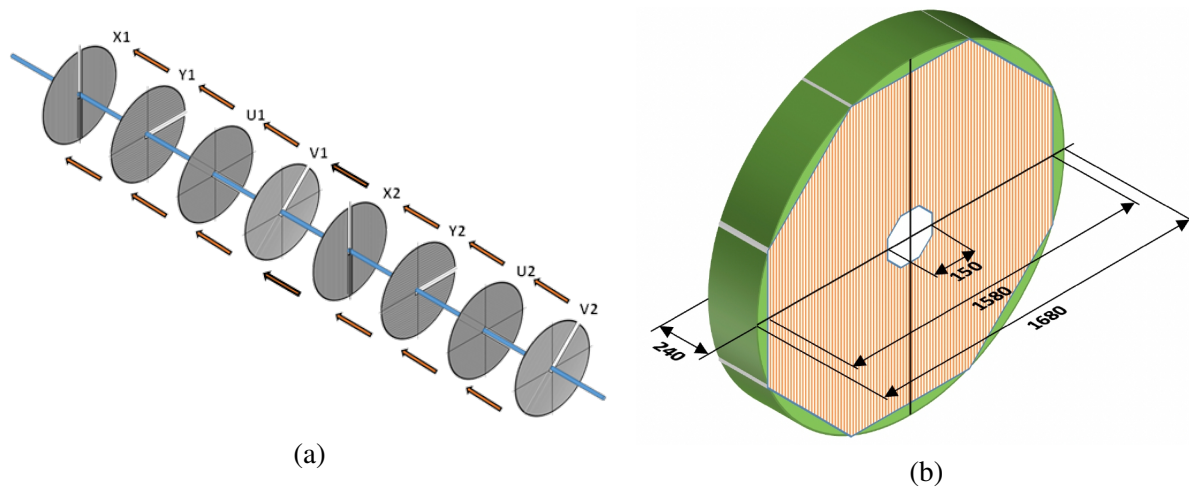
(a) ST end-cap consisting of 8 coordinate planes assembled together. (b) Common view and main dimensions.
